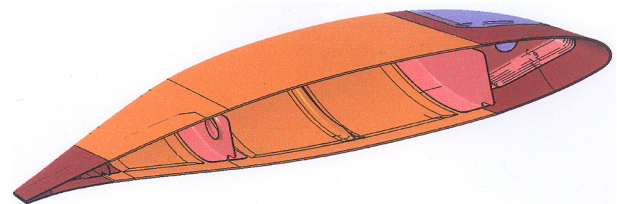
Assembly of Wing Tip (IS Rib not shown)
